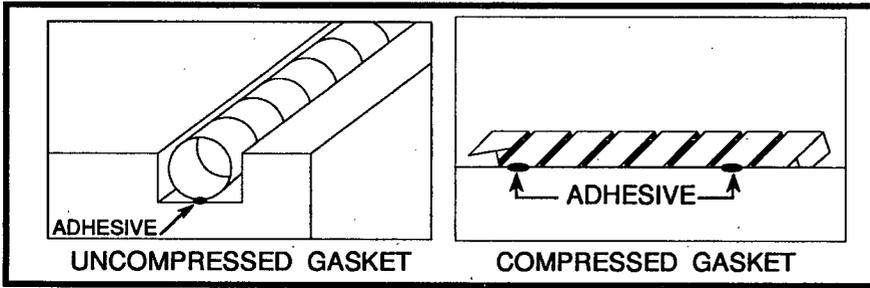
Gasket Held in Place by Dots of Adhesive in Wide O-Ring Groove.
